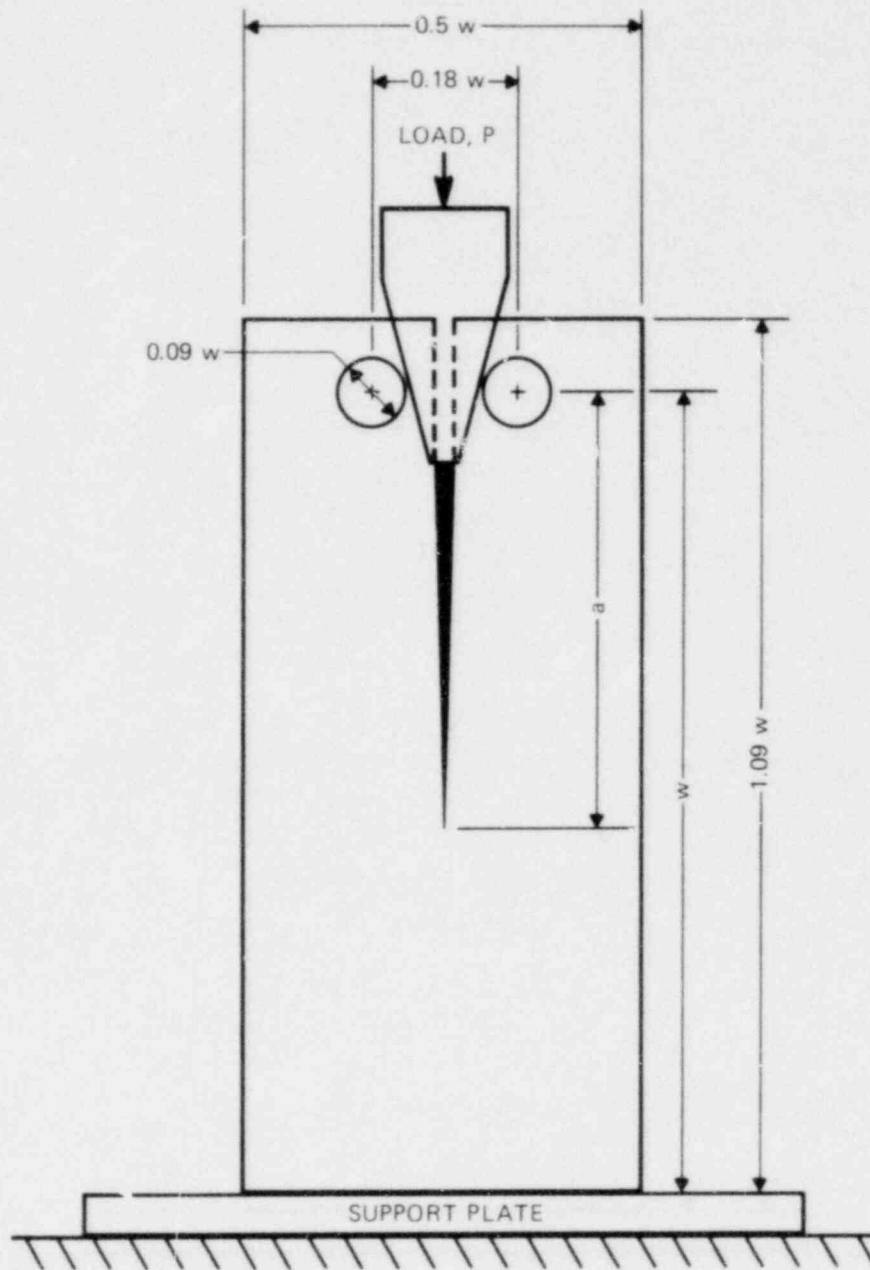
Geometry and loading of wedge-loading RDCB specimen used for this study.
